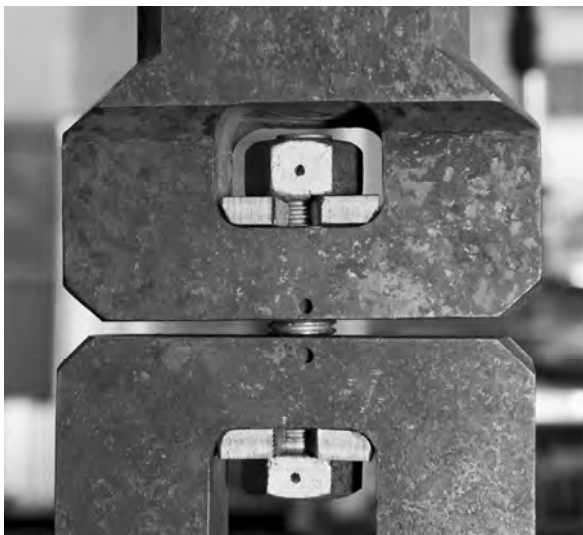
ESH testing equipment used for turned-down bolt and bolt assembly testing.
